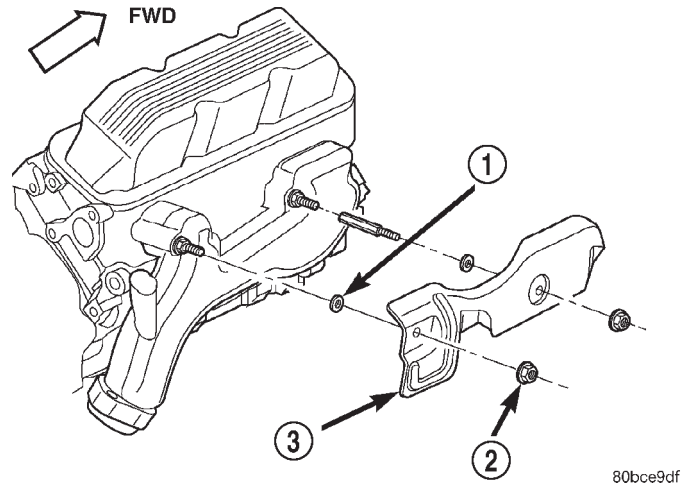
Exhaust Manifold Heat Shield—Right Side
